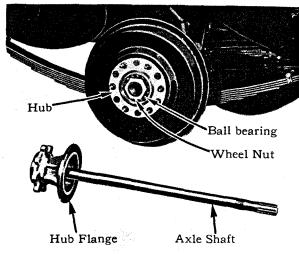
Axle Shaft, Flange and Hub-Wire Wheel Equipment
